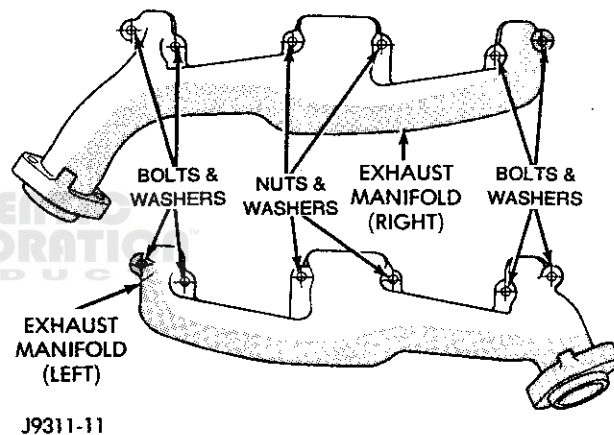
Engine Exhaust Manifold Installation—5.2L/5.9L Engines
